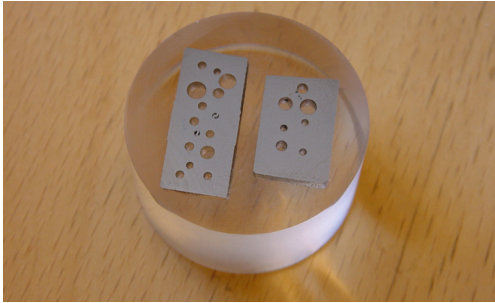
Test specimens for investigation of machined surfaces inside holes.
